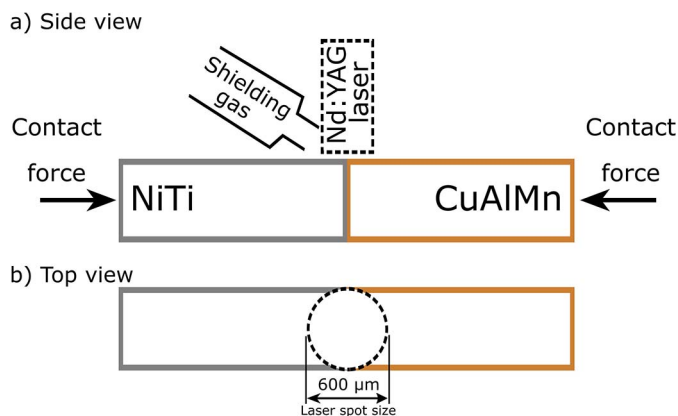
Experimental set-up used for laser welding NiTi and CuAlMn shape memory alloys (not to scale): a) side view; b) top view.
